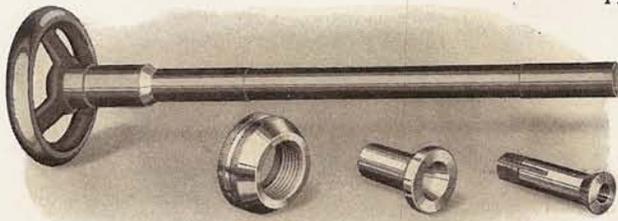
Hand-Wheel Draw-in Collet Chuck Attachment
